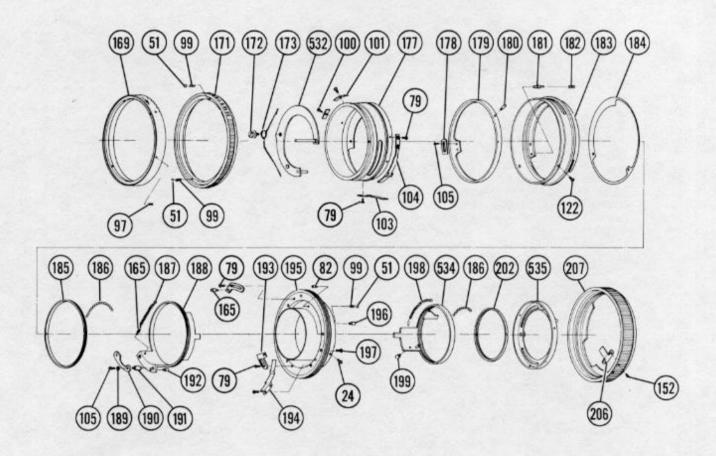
Mount Assembly, Canon (Ref. 550, Pg 58)
